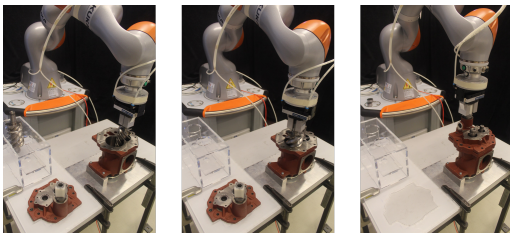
The robot performing the assembly sequence of the compressor parts. From left to right: assembly of the small rotor, the big rotor, and the housing lid.
